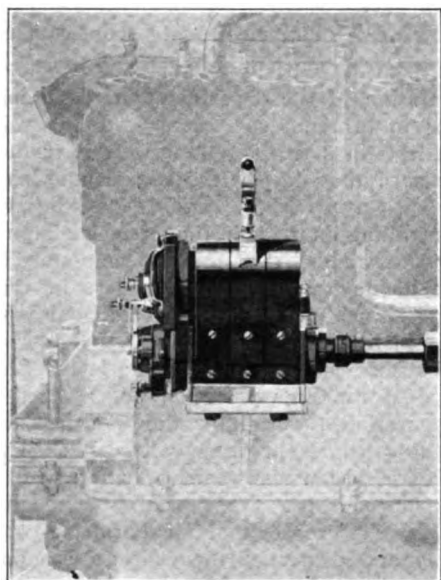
BRACKET MAGNETO STEADYING DEVICE ON KISSEL ENGINES
